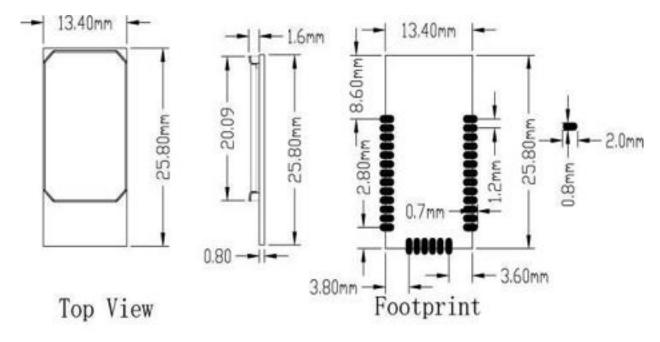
Recommended PCB Mounting Pattern (Unit: mm, Deviation:0.02mm)TOP View
